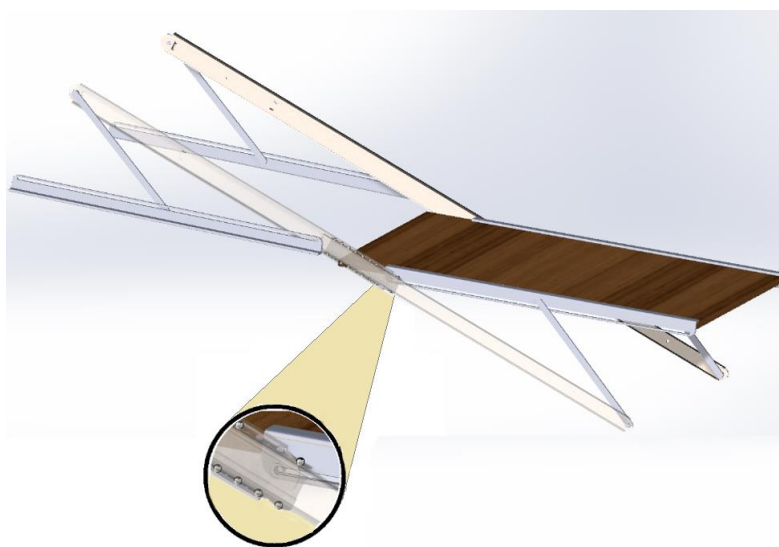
Collapse mechanism. Sliding pin and groove [4].
